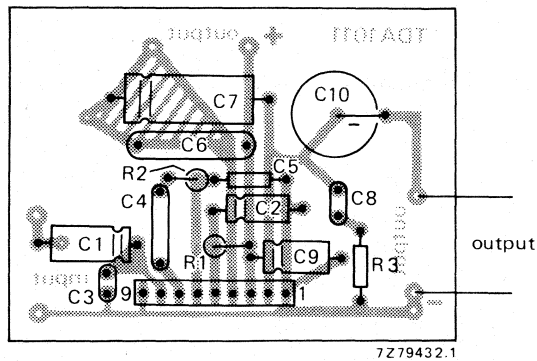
Component side of printed-circuit board showing component layout used for the circuit of Fig. 4.
